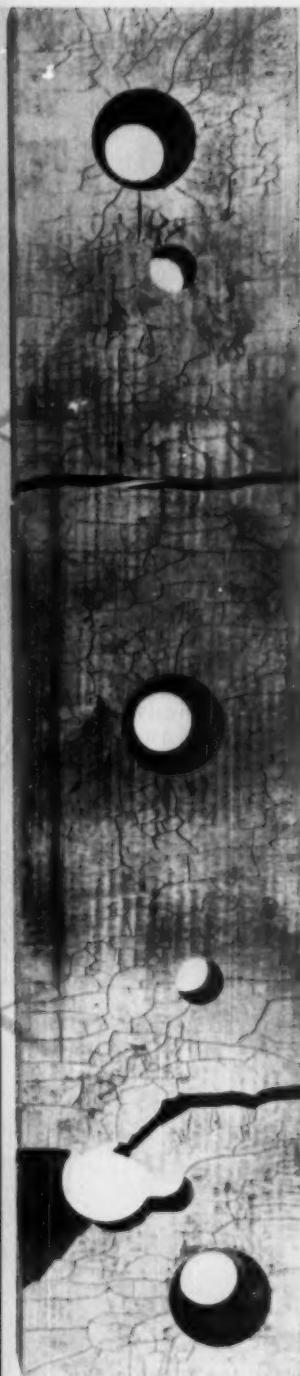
Manganese Oil Hardening Steel Die, Severely Cracked in Grinding
